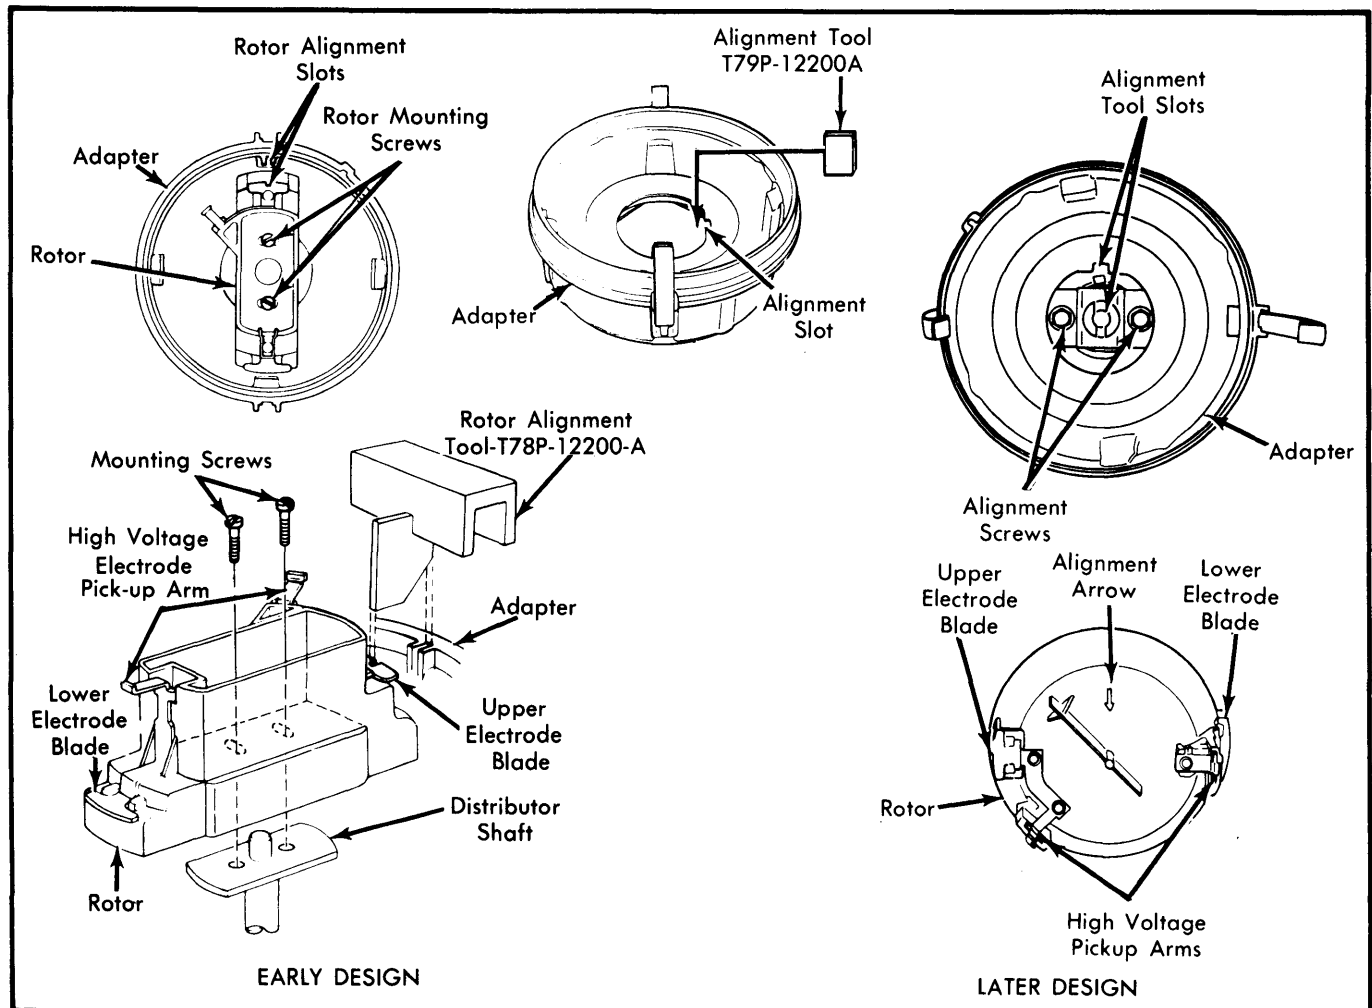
Early and Later Design EEC Distributor Rotor Alignment
